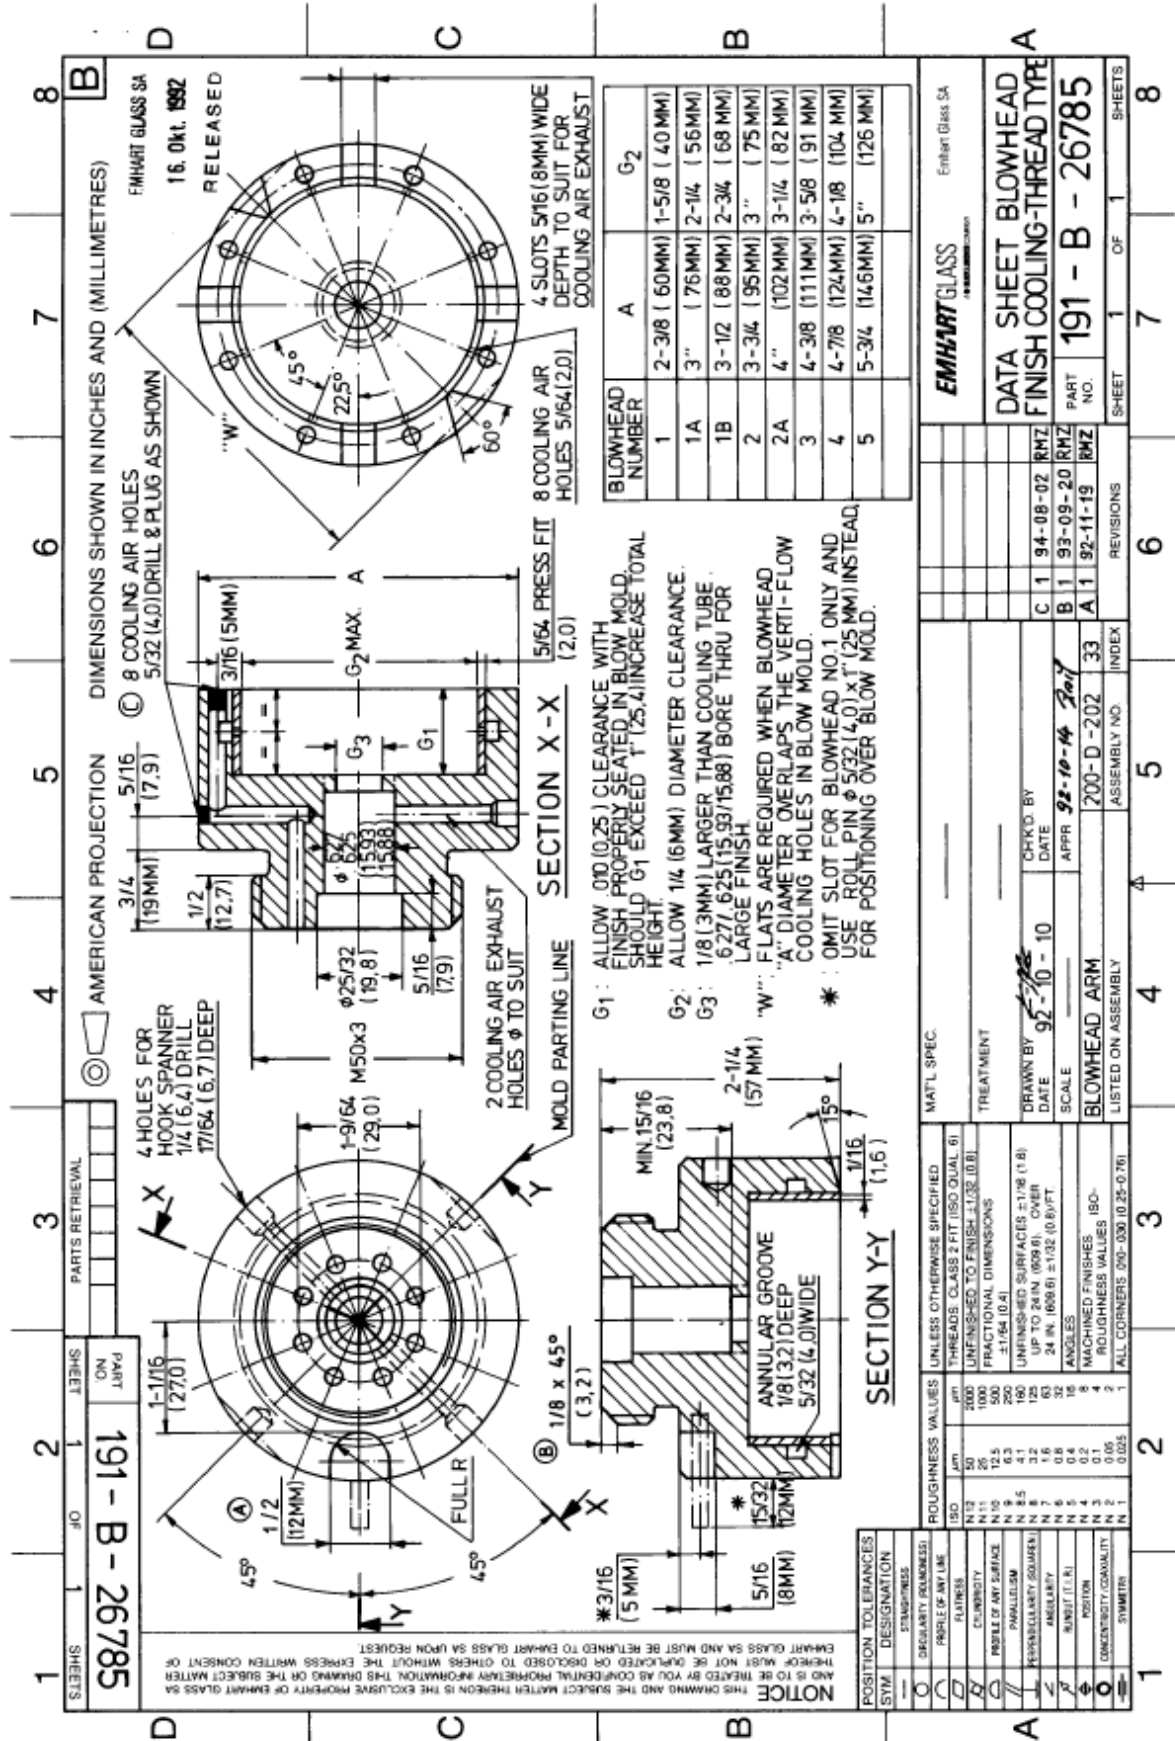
Cross Section of DG 4 -1/4" Blowhead Arm (Bayonet and Thread Type shown)
